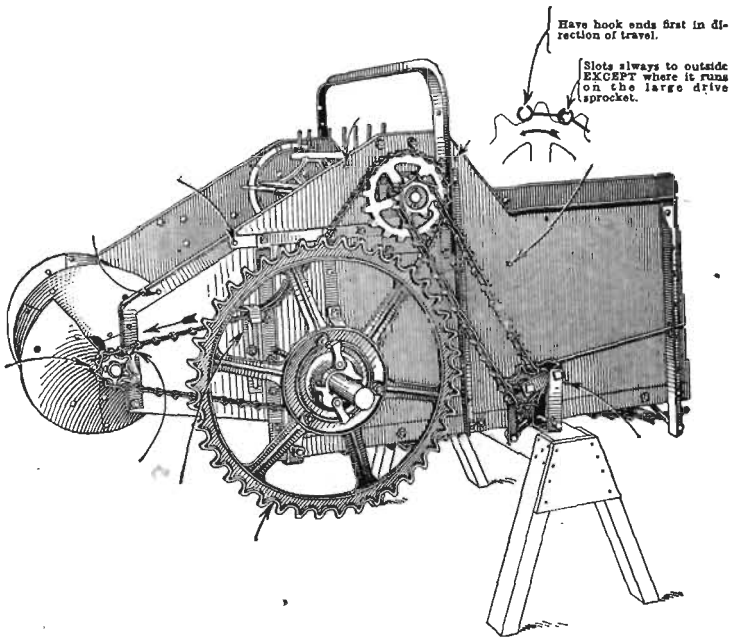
Beater drive. The main beater on this spreader is on the rear axle.
